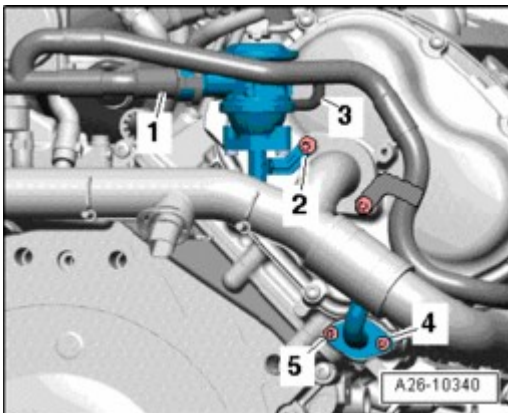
Removing Bolts At Bottom Of Right Secondary Air Injection Combination Valve
